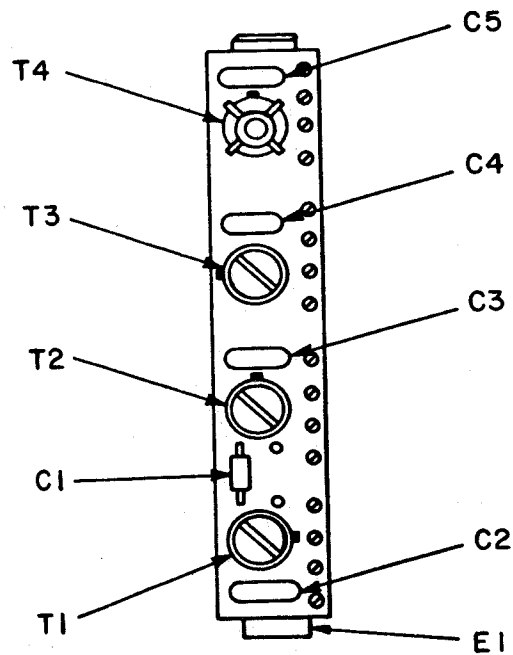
27 MHz Subassembly A2A4A17, Component Locations
